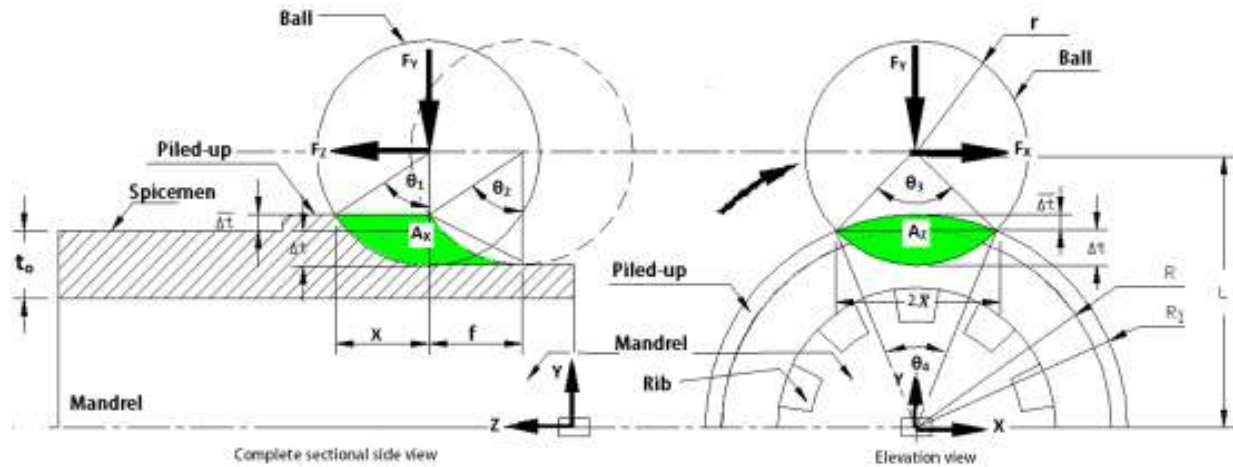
Engineering drawing of projected area for ball impress in specimen
